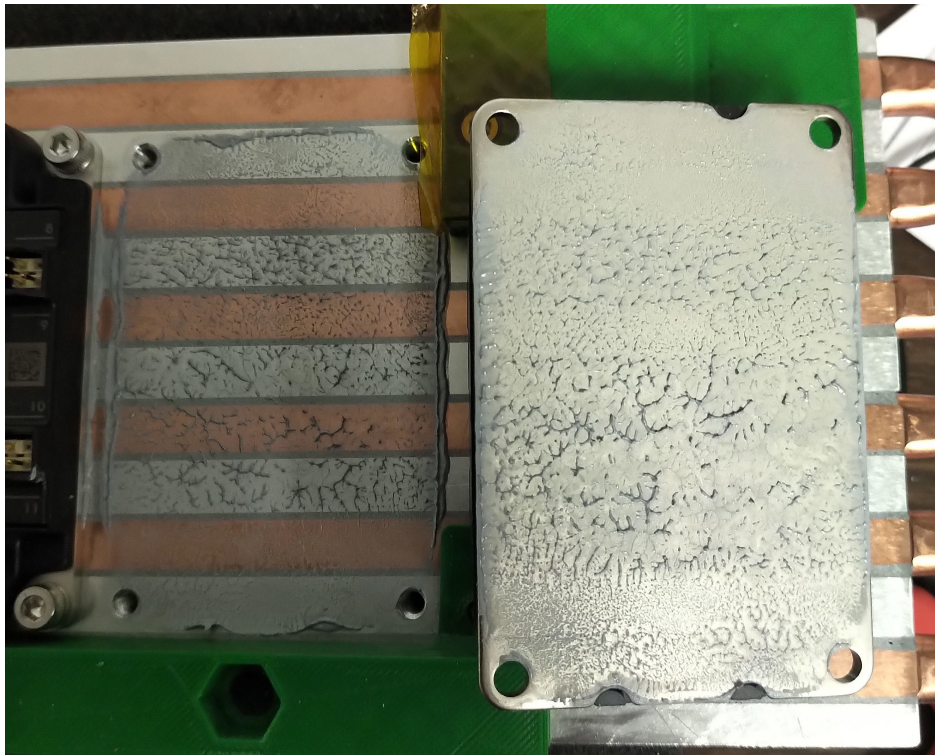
XM3 Module Removed From Heatsink to Show TIM Spread
